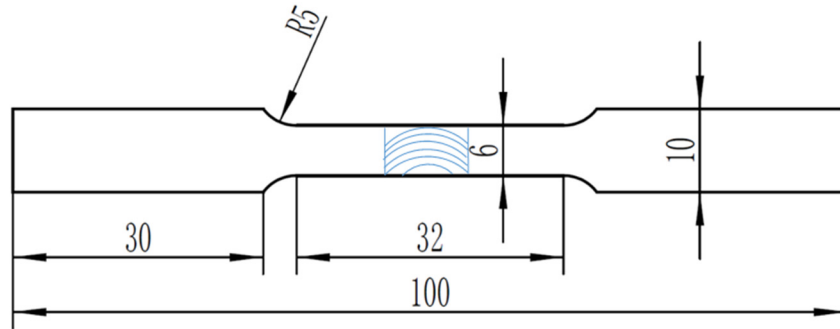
Tensile specimens with the weld in the center (Unit: mm)
